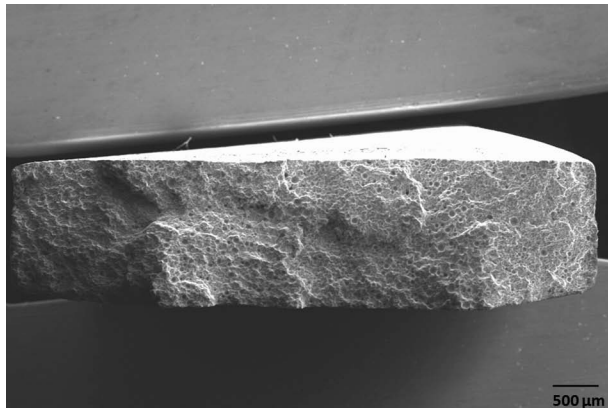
Fracture surface of a tensile-tested AA 2219-AA5083 TIG welded joint after repair welding. The specimen was tested at room temperature. Note specimen failed in the weld
